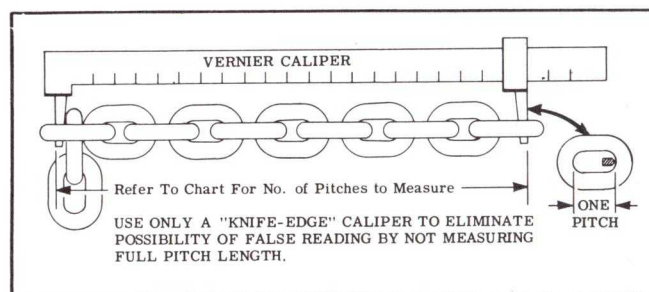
Checking Coil Chain Using Vernier Caliper
